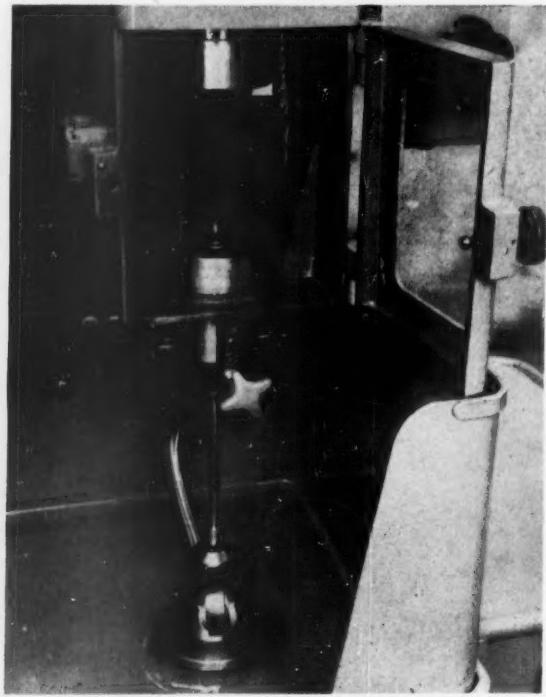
Details of the Beisner-head boring system fitted to the Hille machine
